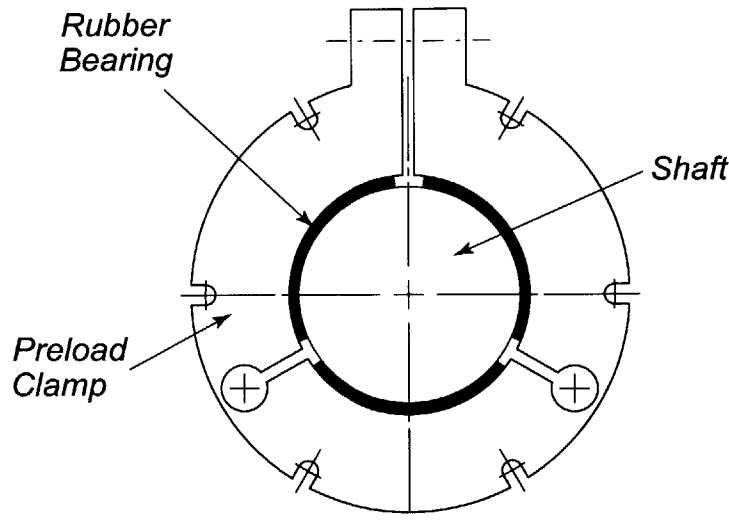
Linear and rotary rubber bearing with self-preloading body.
